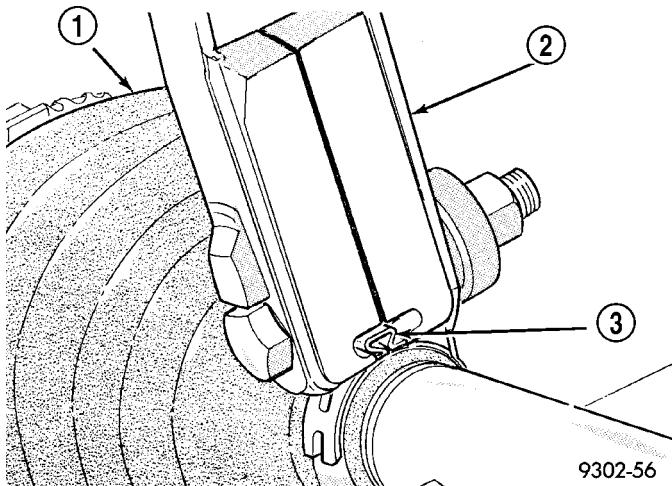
Crimping Tool Installed On Sealing Boot Clamp
